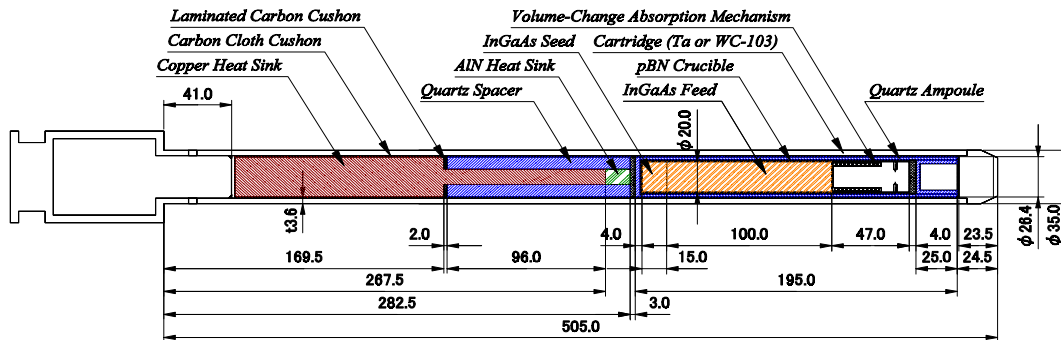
Cross sectional view of a cartridge (dimensions in mm).
